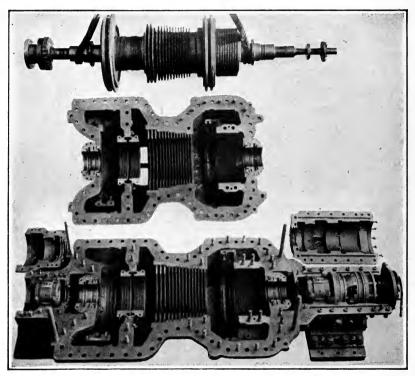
Cylinder base, cover and rotor. Westinghouse turbine.
